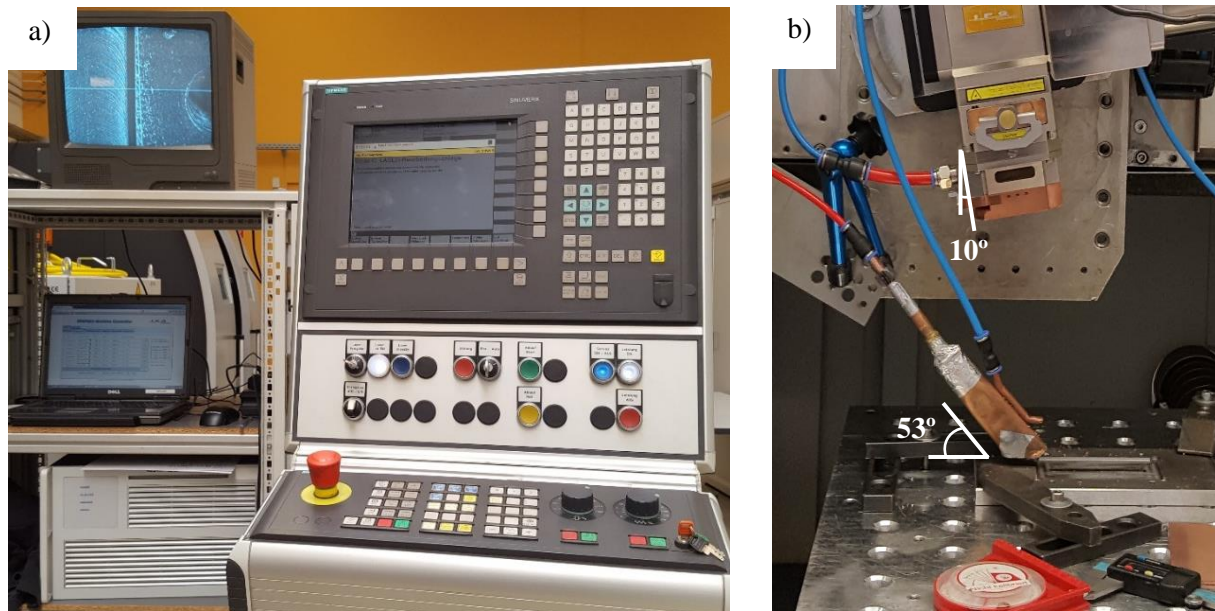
Experimental set-up. a) Control equipment; b) Shielding device and beam angle.
